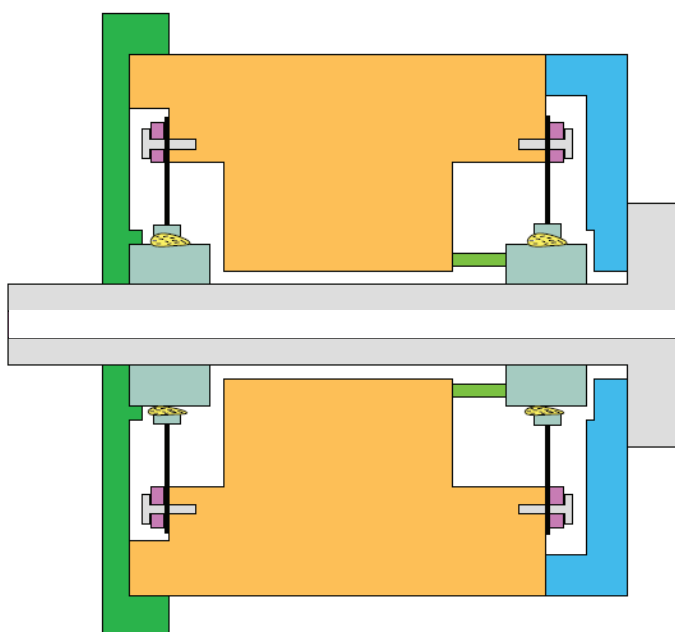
Alignment concept consisting of electric stator (orange), alignment shaft (gray), thrust bearing disk (blue) and front centering flange (green)
